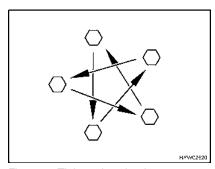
Tighten the wheel nuts or wheel bolts cross-wise
